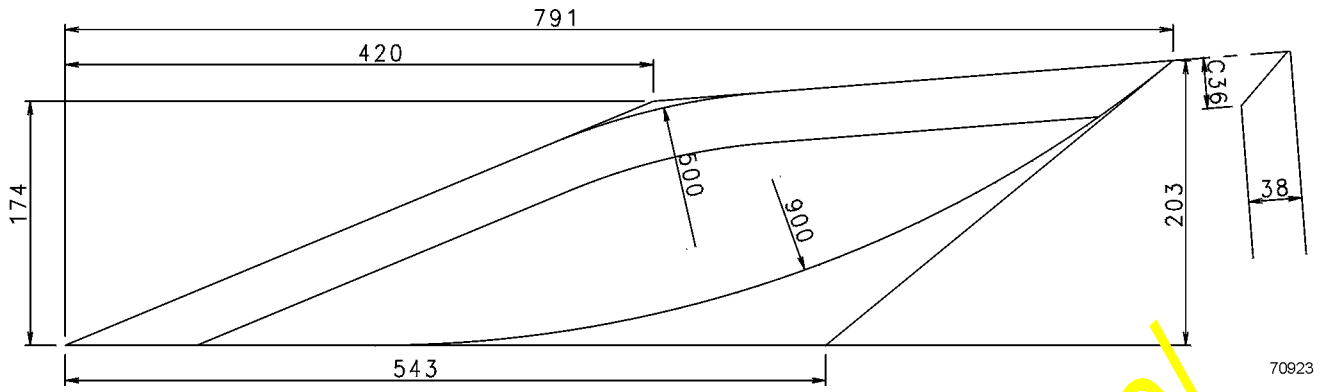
REINFORCEMENT PLATE R.H.(562-22-33970)
